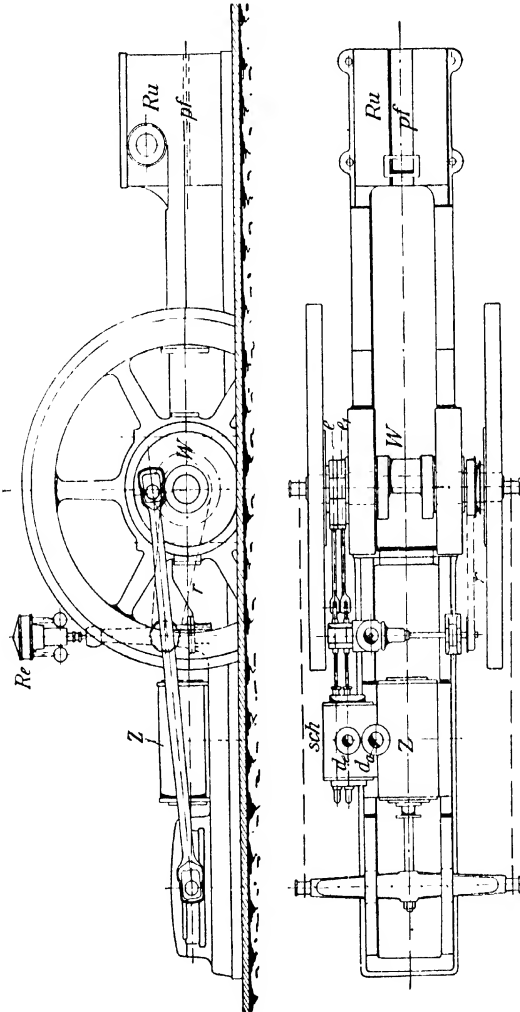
Buckau design of Exter press with Ridel's expansion valve gearing (1896). Side view and plan.
